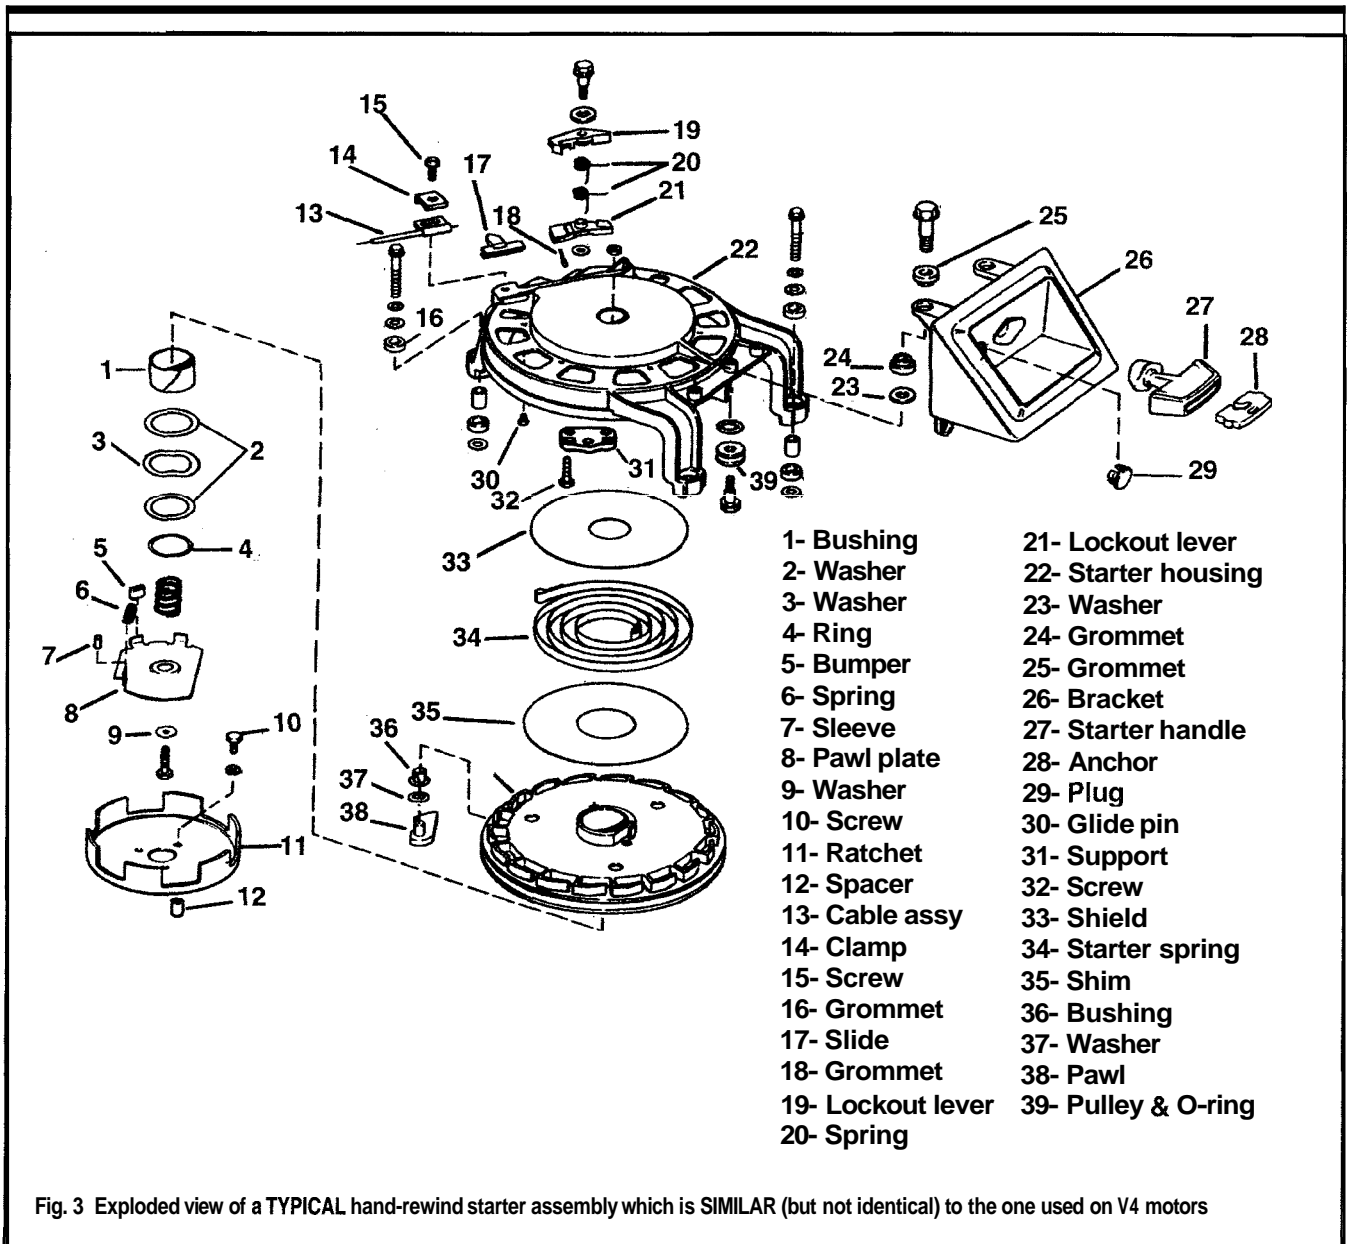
Exploded view of a TYPICAL hand-rewind starter assembly which is SIMILAR (but not identical) to the one used on V4 motors
